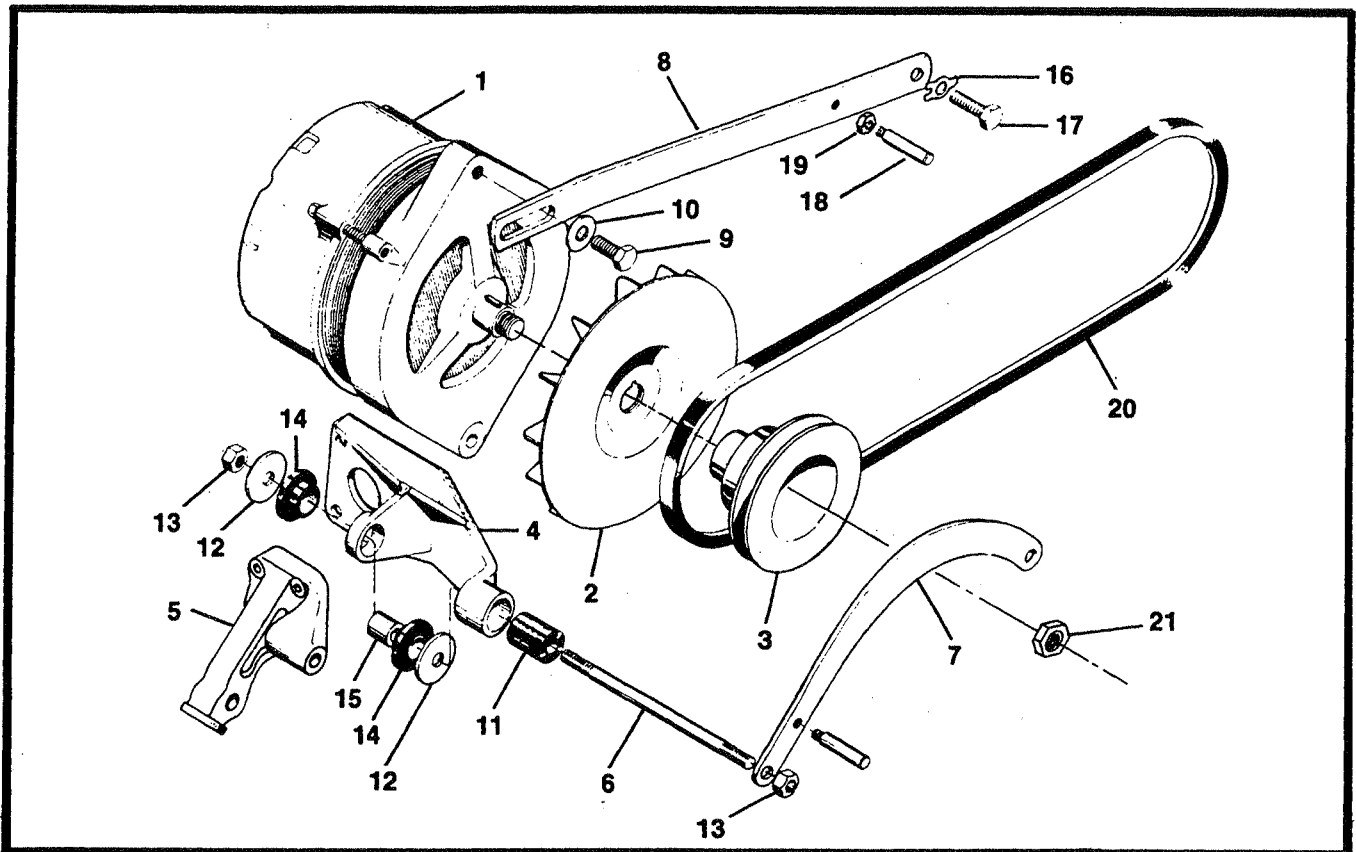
B. ALTERNATOR (OPTIONAL EQUIPMENT) ALL MODELS.
